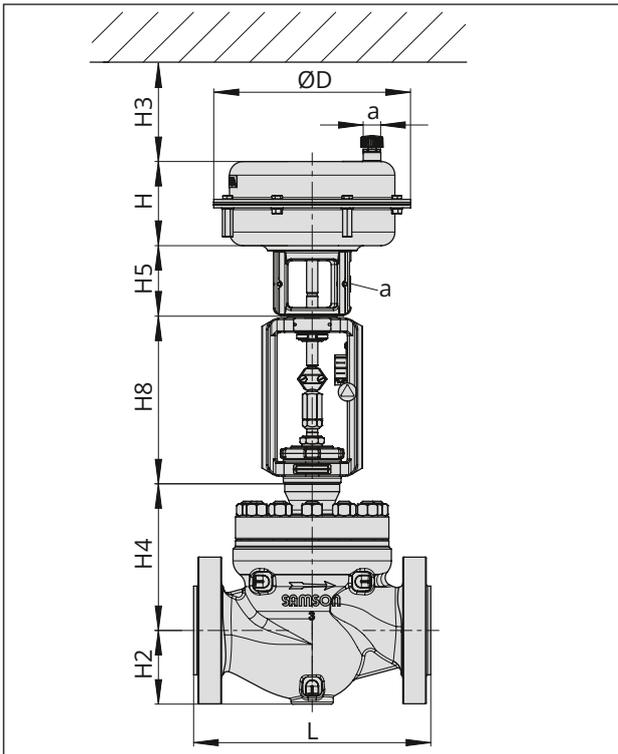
SMS MG-7 Control Valve: Type 251GR Valve with Type 3277 Pneumatic Actuator
